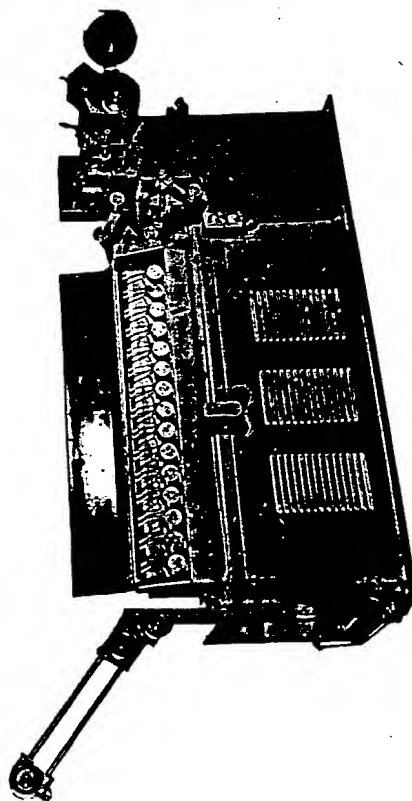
16-Die Linebox. (Courtesy The Vaughn Machinery Company)
